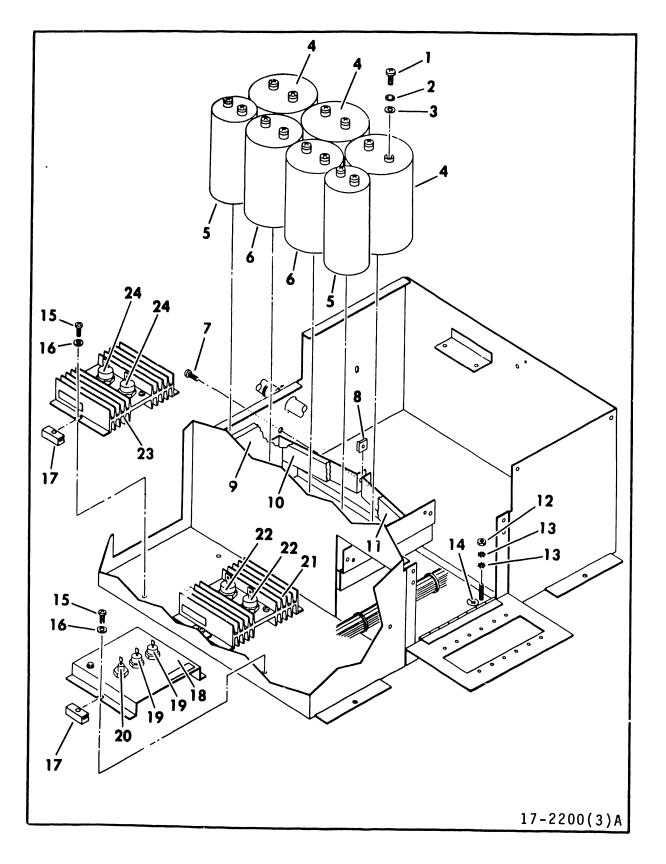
A-22. DC Power Supply Assembly (Sheet 3)
